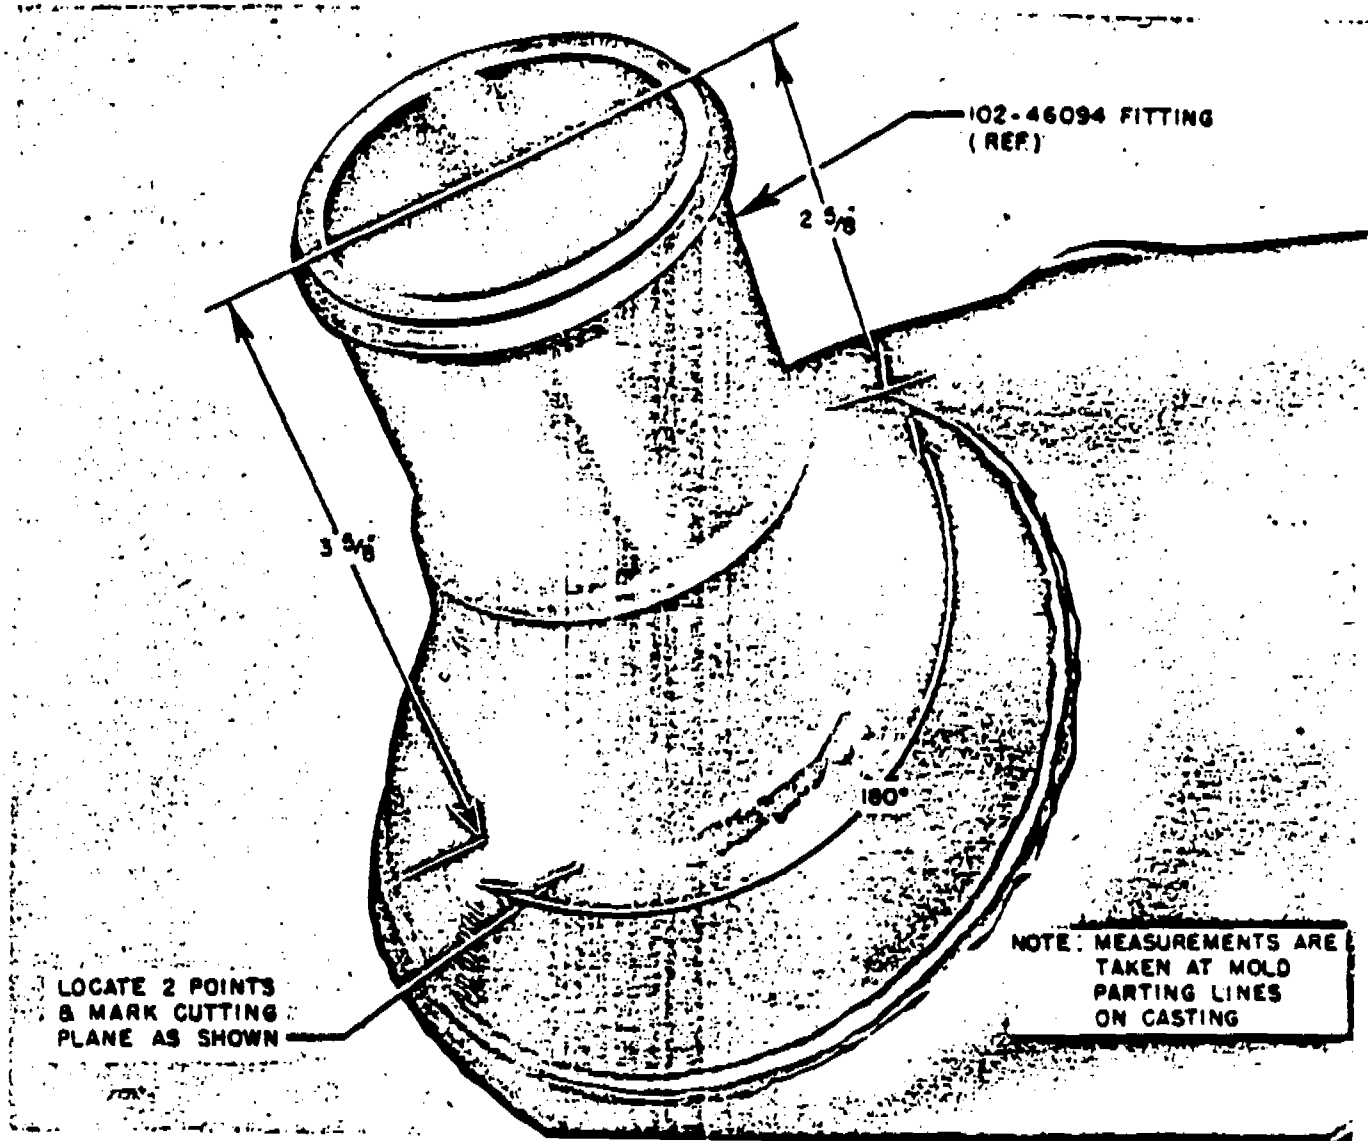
Indicated Cutting Plane on Tank Outlet Fitting,
